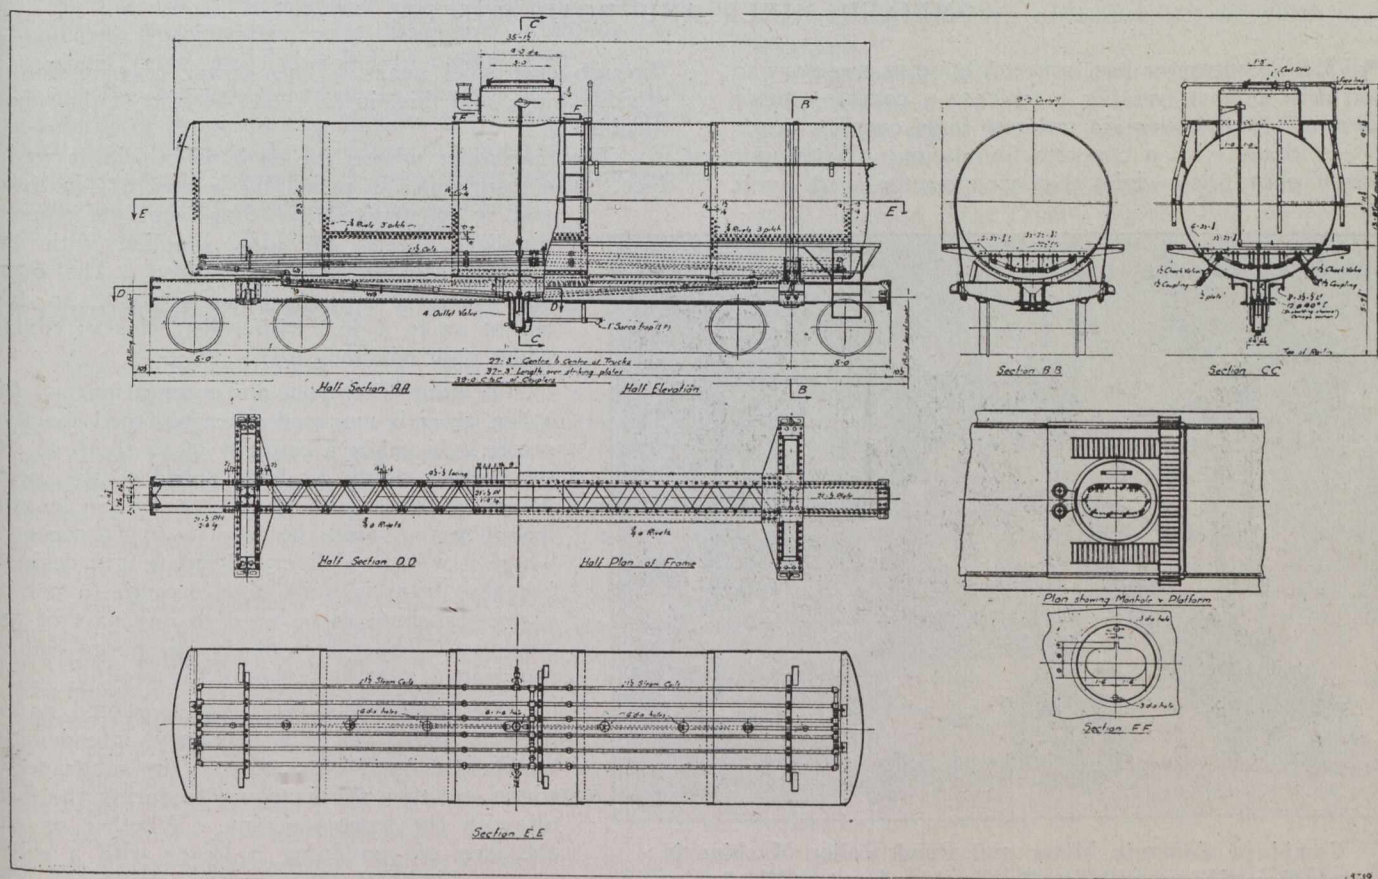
Design of G.T.P. Fuel Oil Tank Car.
